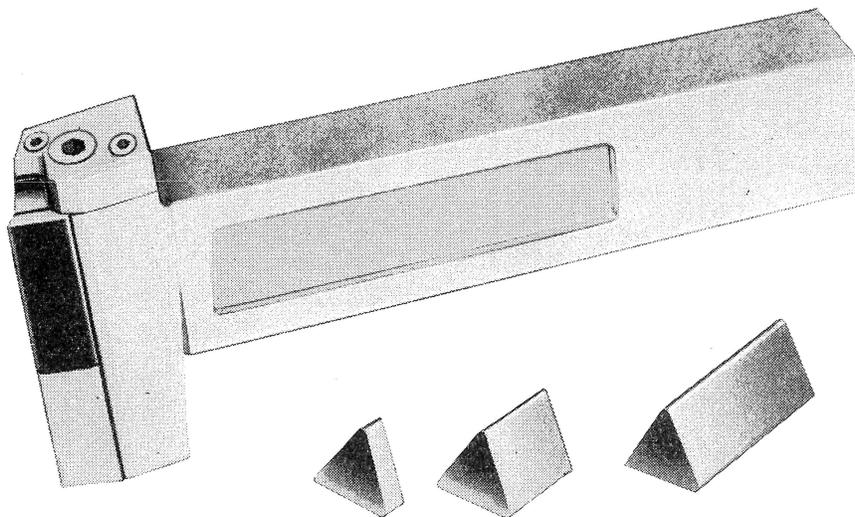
Toolholder for indexing insert (V-R vertical) with permanently clamped chip breaker, and three insert lengths. (Courtesy The Vascoloy-Ramet Corp, Waukegan, Ill)
